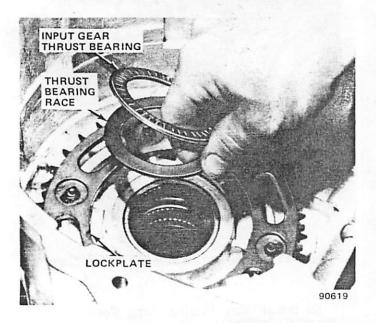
D-24 Input Gear Thrust Bearing and Race Removal—Instaliation
